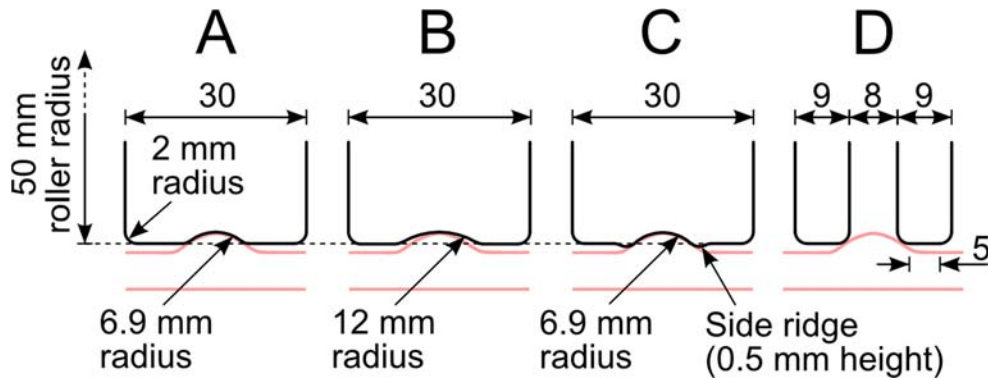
Different roller profiles used in the investigation. The initial weld seam profile (from laser coordinate measurements) is shown in red.
